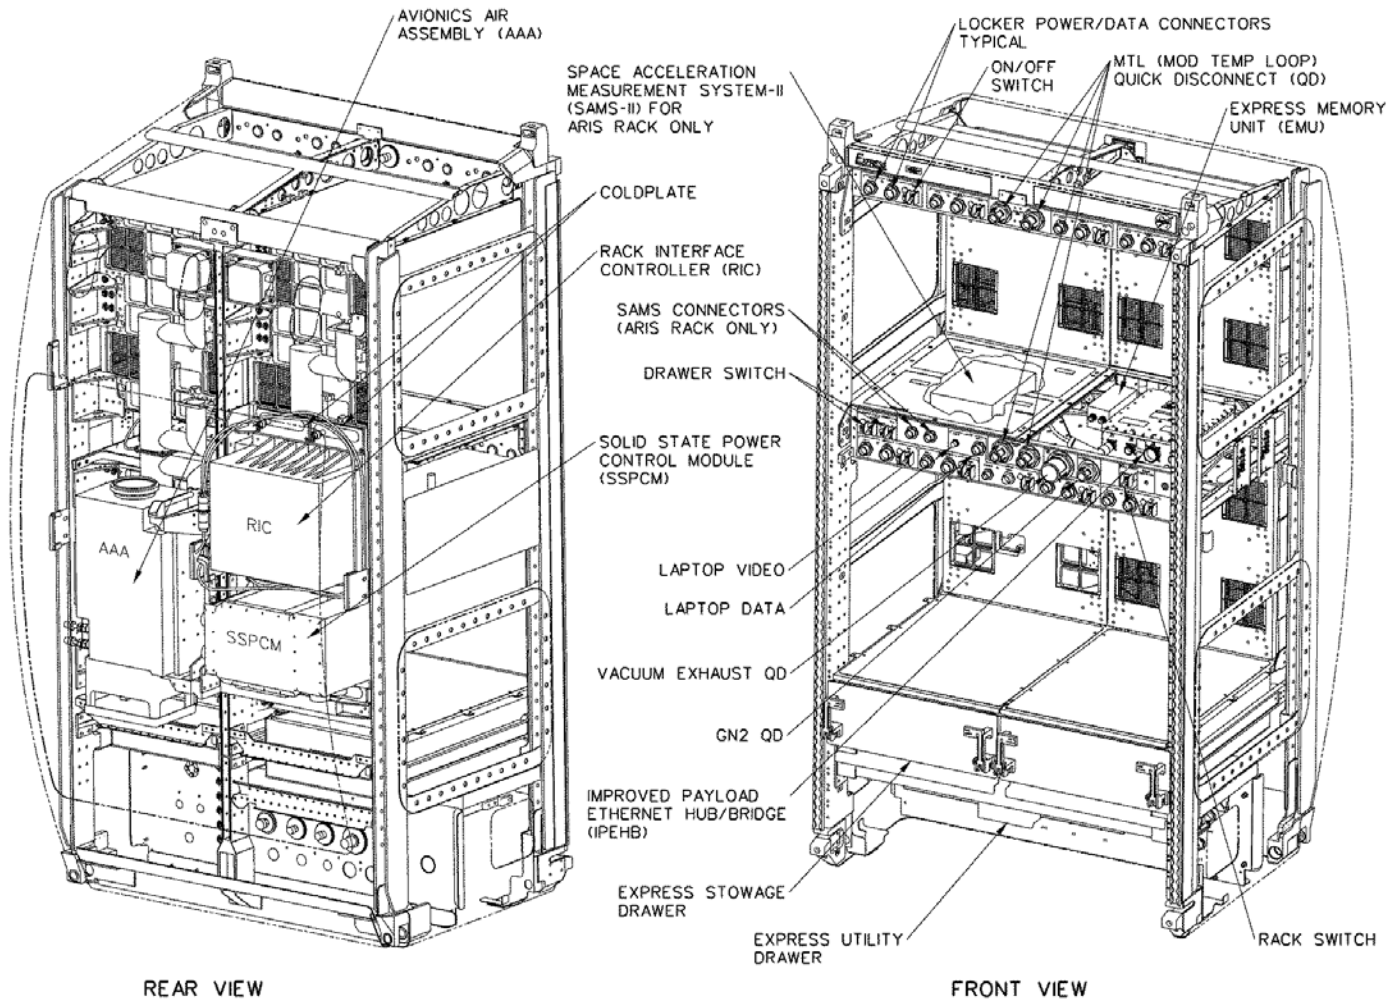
EXPRESS RACK CONFIGURATION EXPLODED VIEW
